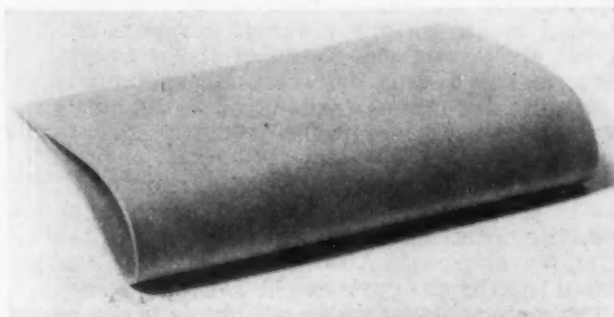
This nozzle vane is of the fabricated type, formed from sheet stock
